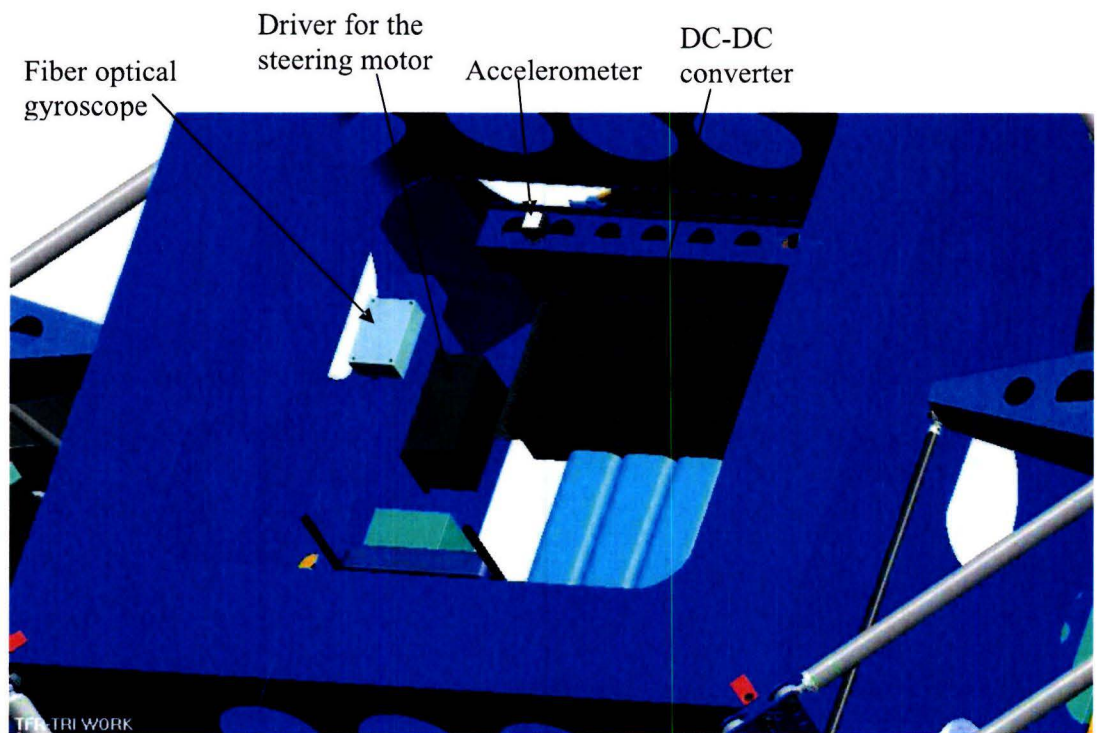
Zoom in view of the main frame with mounted parts
